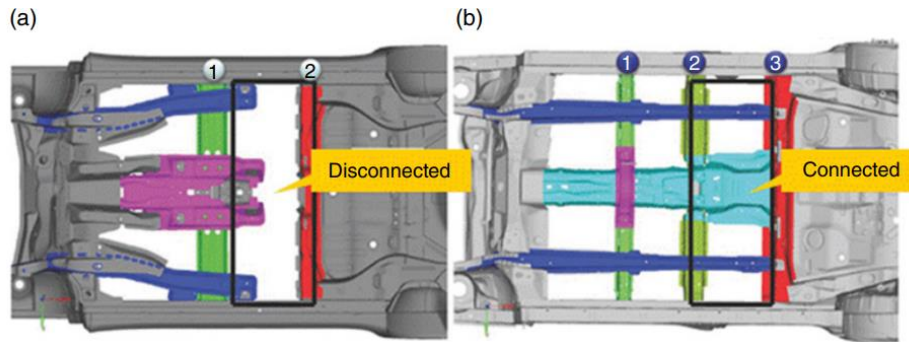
Typical floor structure: a) open loop; b) closed loop [97].
